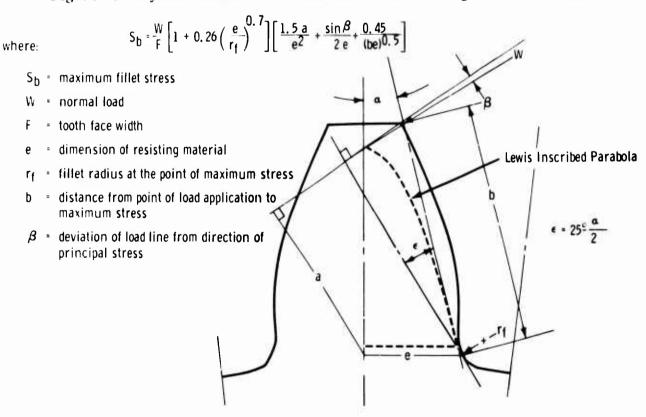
Kelley-Pedersen Construction and Gear Tooth Bending Stress Formula.
